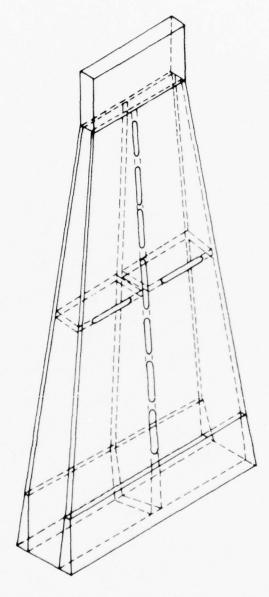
Basic HY-80 Hydrofoil, Tapered Box Beam; Slot-Weld Configuration
